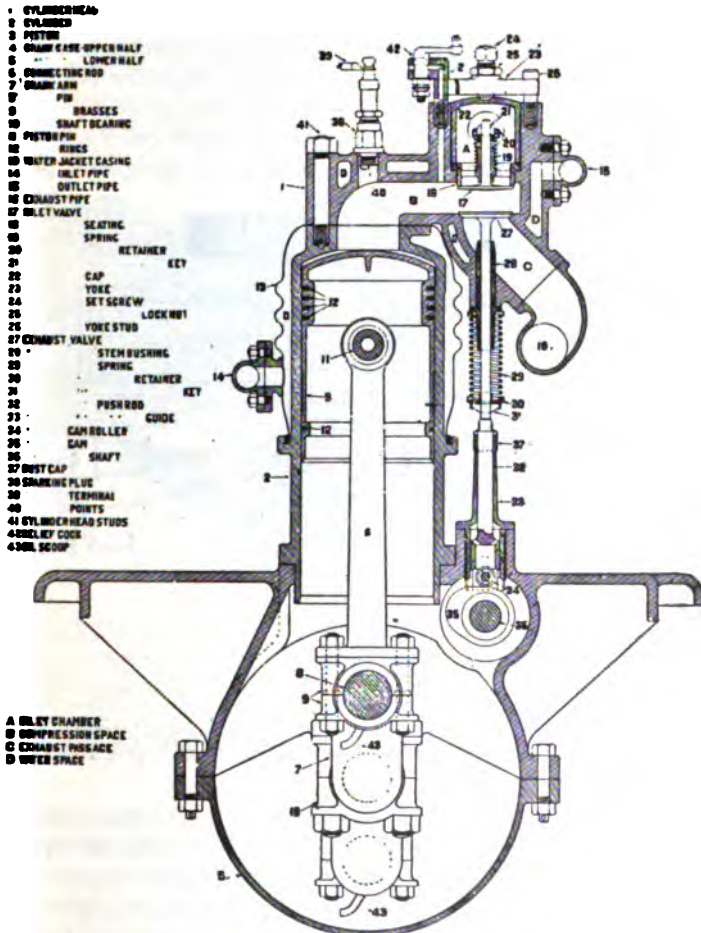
Section through one Cylinder of the Pope-Toledo Motor, showing parts and construction.
